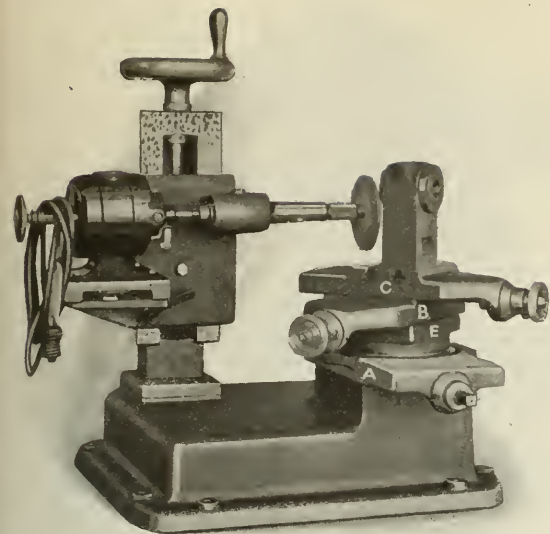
Profile Grinder built by Cleveland Milling Machine Co.
